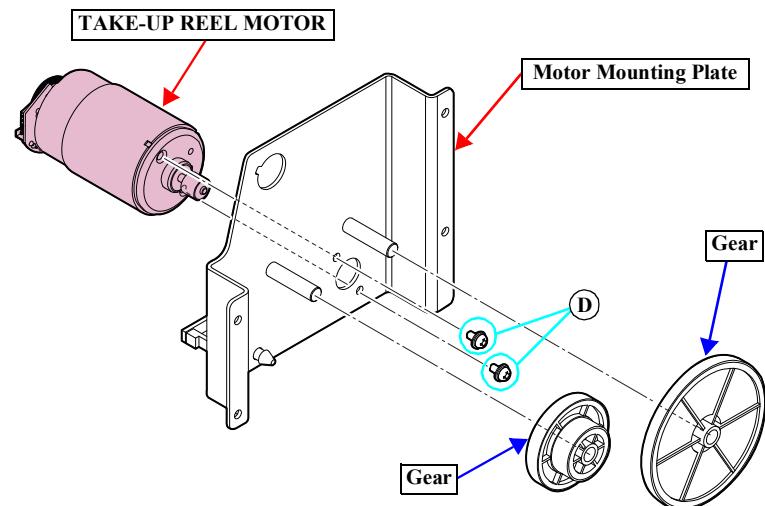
Removing the TAKE-UP REEL MOTOR
